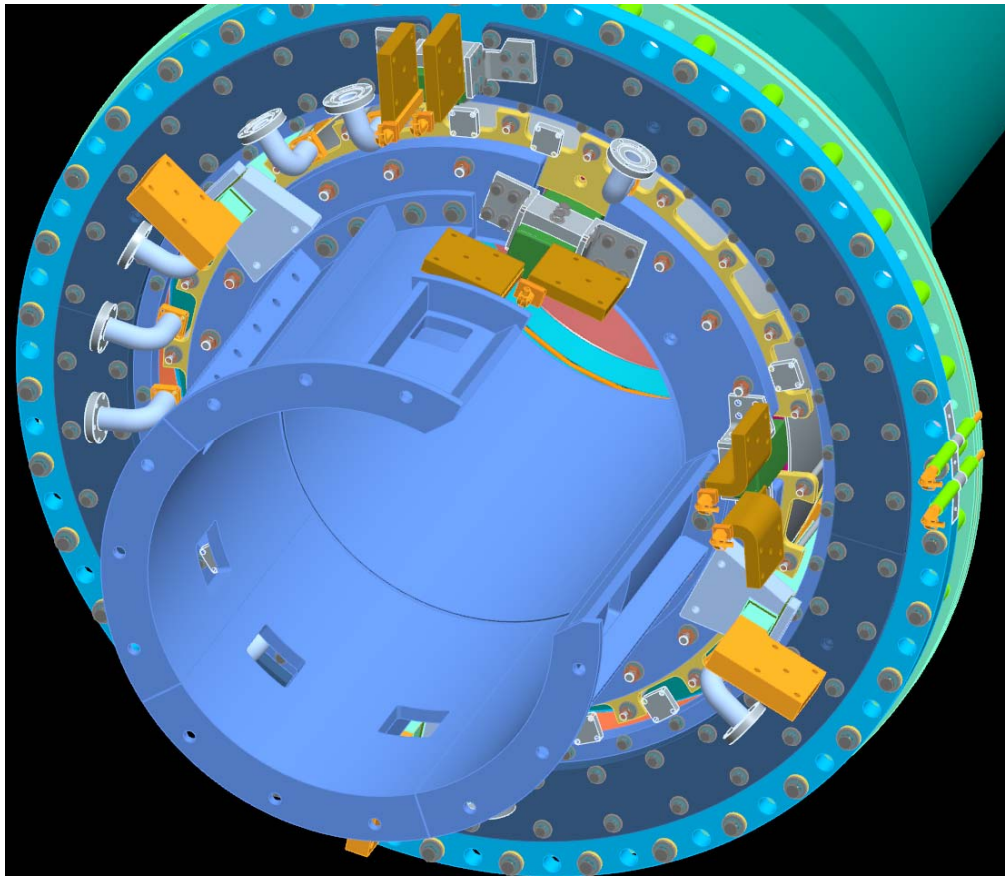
Lower Mandrel Assembly (October 2011 version with 11 5/8 inch bolts in the lower flange)
